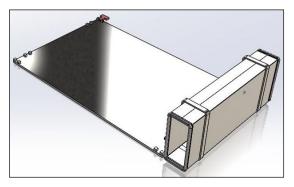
Floor Plate with Built-in Ventilation Duct
